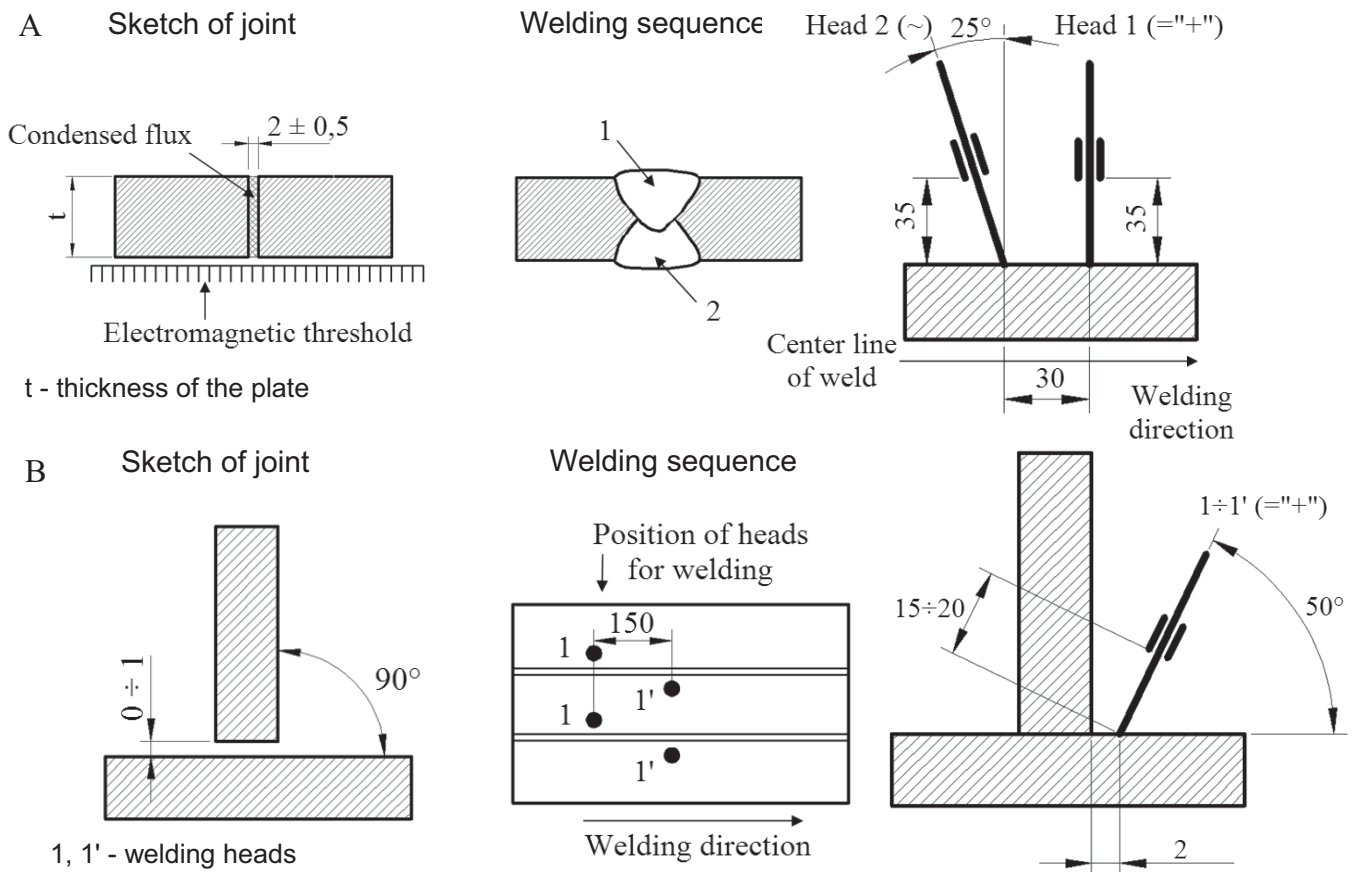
Details of preparation of elements to welding with the use of SAW-tandem technology:
